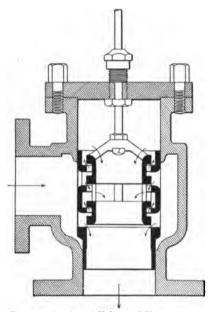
Section of Valve and Valve Seat of Waters Governor
